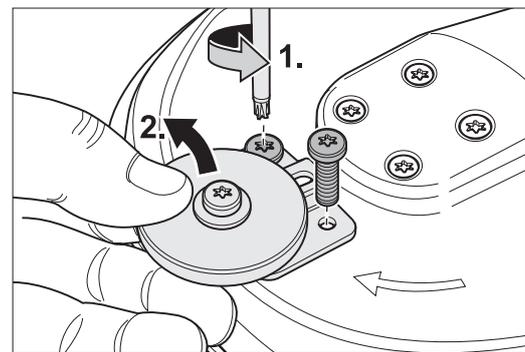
Remove the fixing screws and take off the complete wall-protecting roller.
